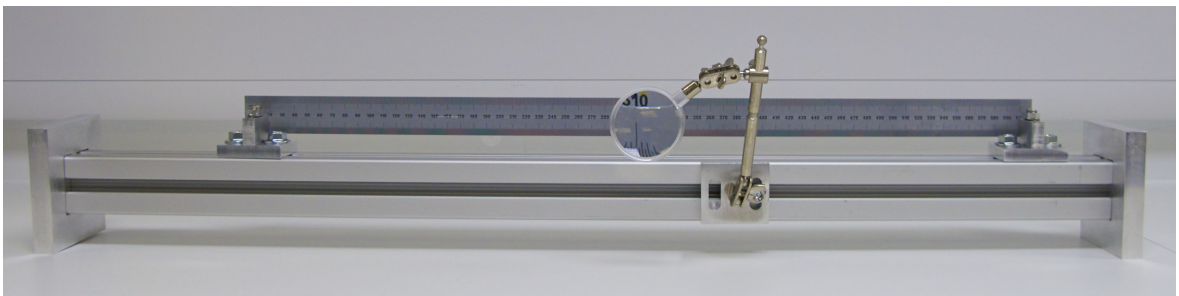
The fibre coating jig. Fibres were loaded with the jig in a vertical orientation and clamped in place. The jig could then be placed horizontally allowing the fibres to be coated. Slots in the fibre clamps allowed a metal rule to be screwed in place, and a sliding magnifying lens assembly allowed detailed viewing of the coated areas during and after coating.
